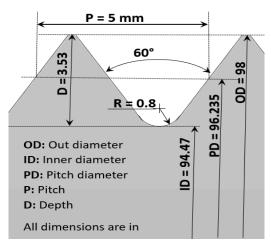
The proposed screw thread dimentions (all dimensions are in mm).
